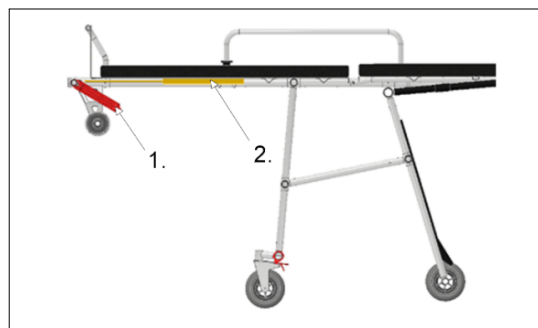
Fully raised position of the stretcher: 1. Pulley mechanism, 2. Hydraulic cylinder.
